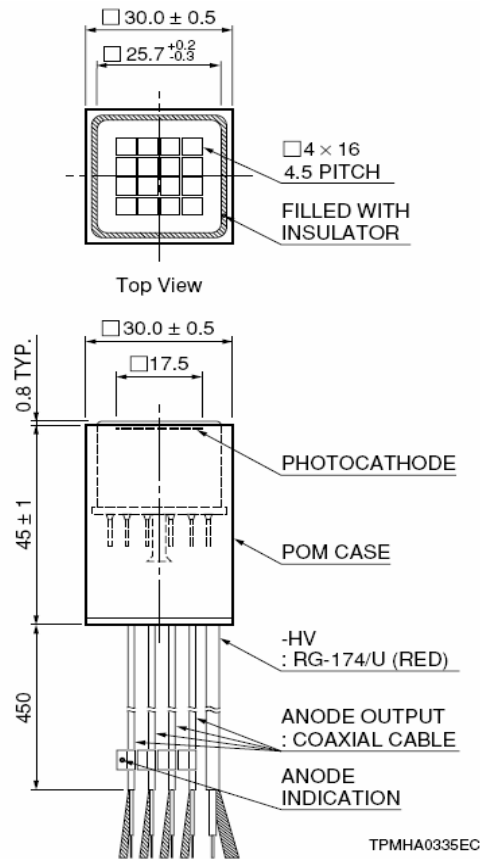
Layout and dimensions of the multi-channel photomultiplier tube H6568. The upper part shows the front view of the cathode grid [11].
